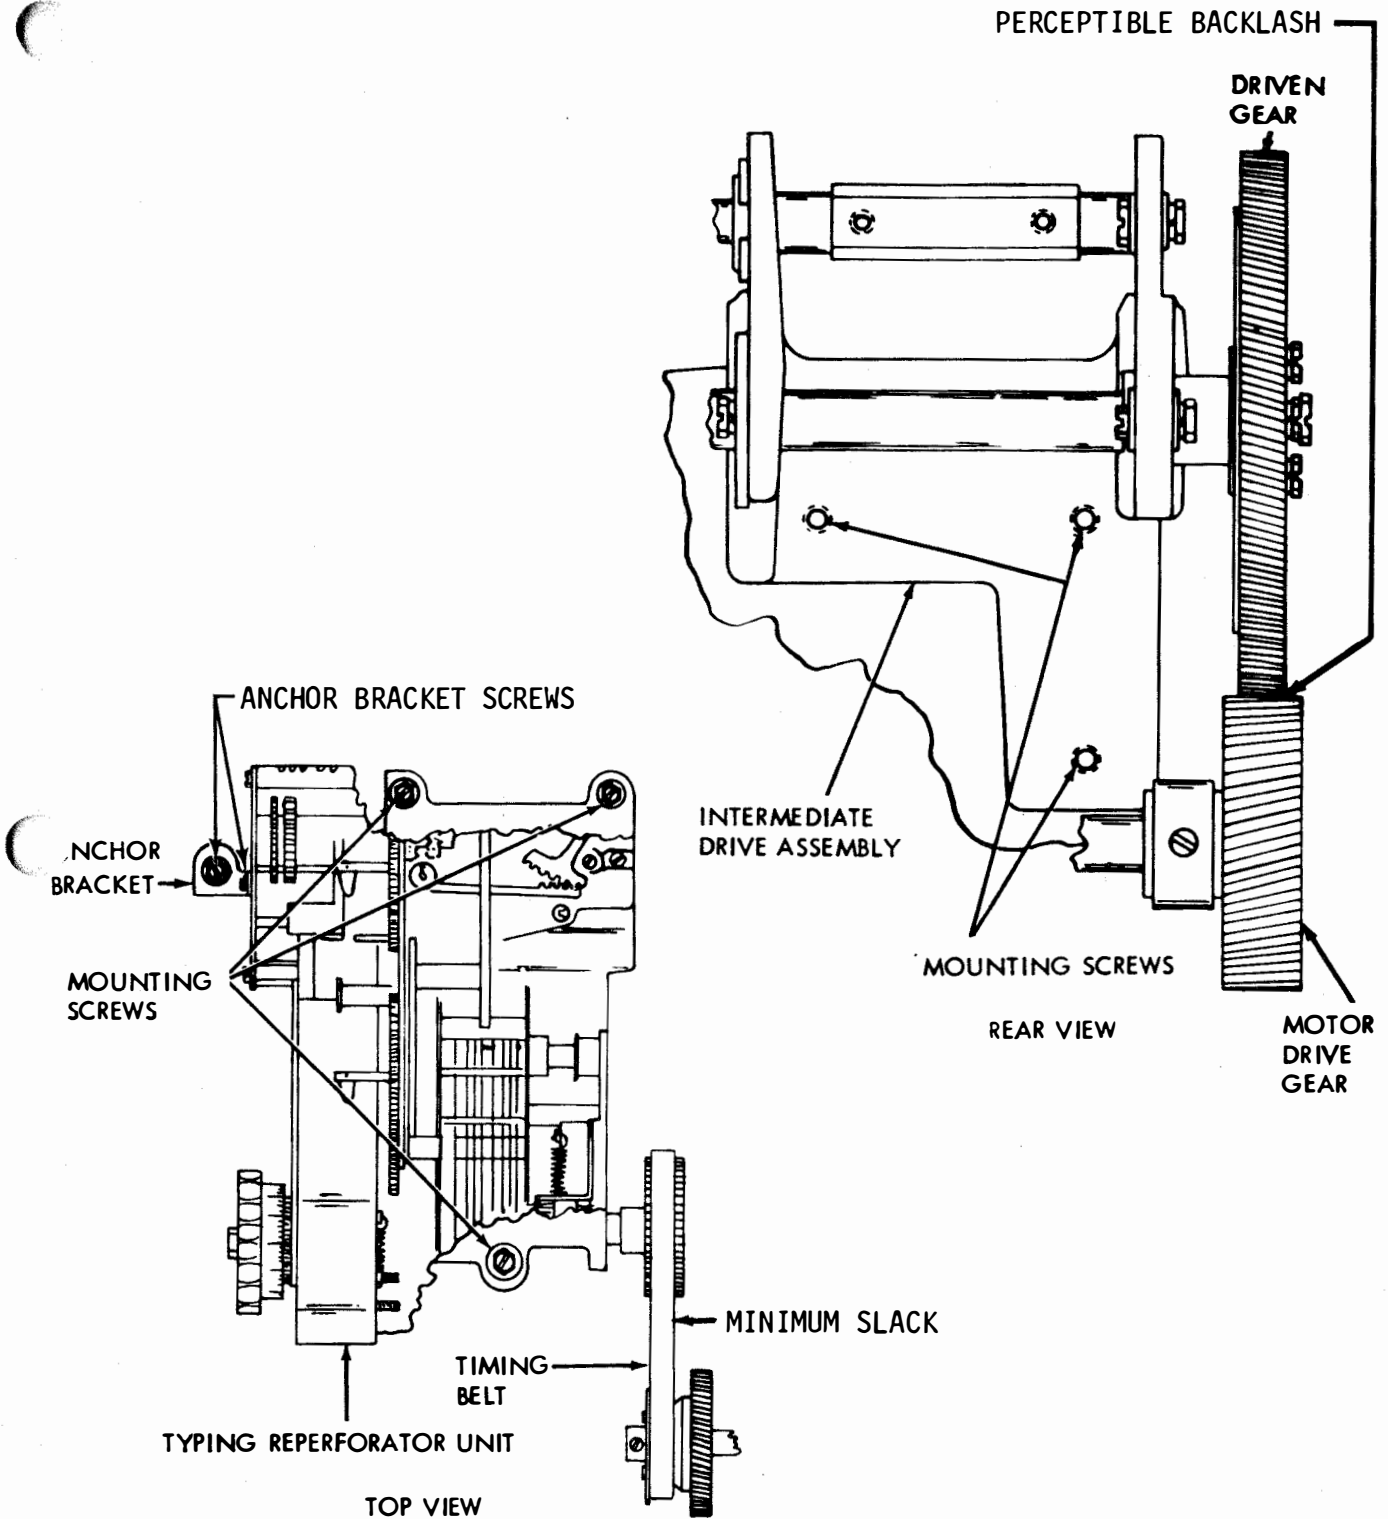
Intermediate Drive Assembly, Timing Belt, and Tape Container
